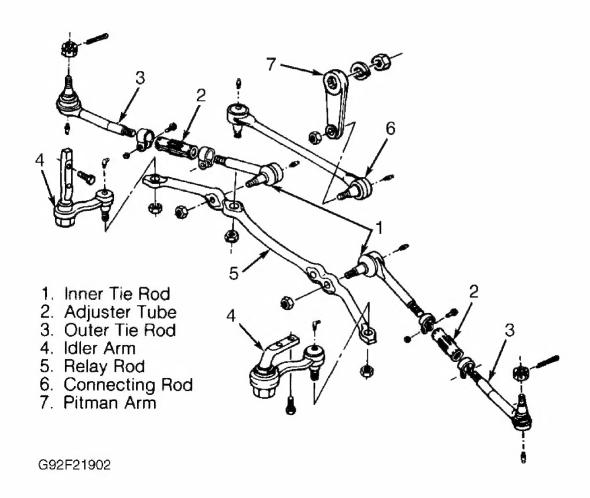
Exploded View Of Steering Linkage ("L" Series) Courtesy of GENERAL MOTORS CORP.
